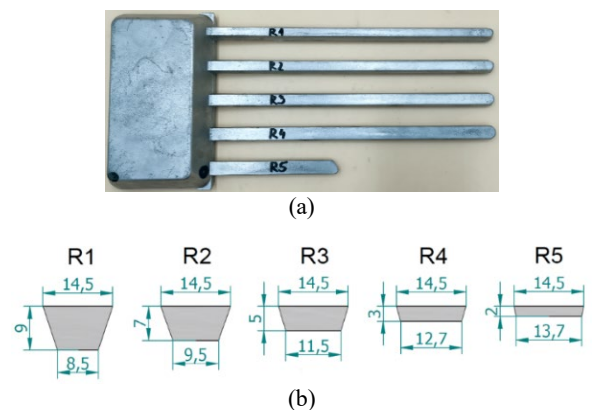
Casting of a fluidity sample (a), drawing of the cross-section of the bars (b)
